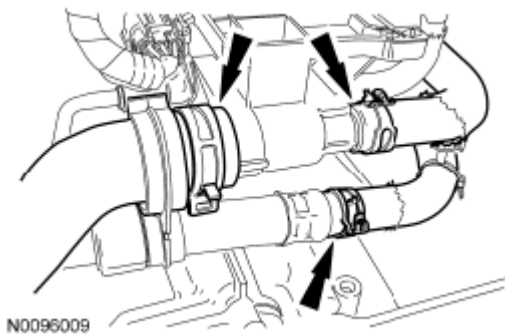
Locating Heater Hoses & Heater Hose In-Line Connector
